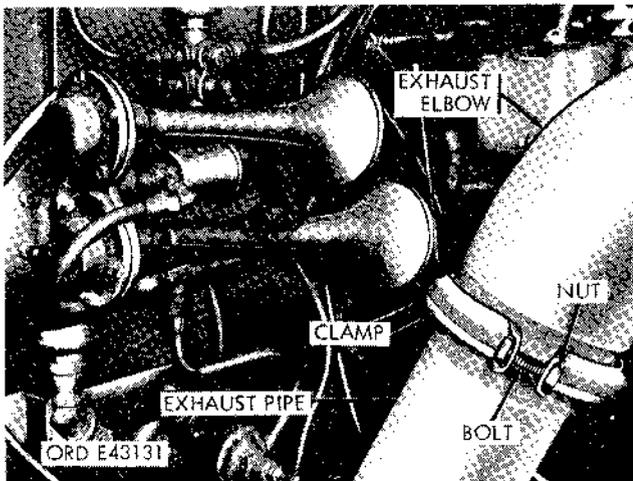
Removing front exhaust elbow clamp—diesel models.
